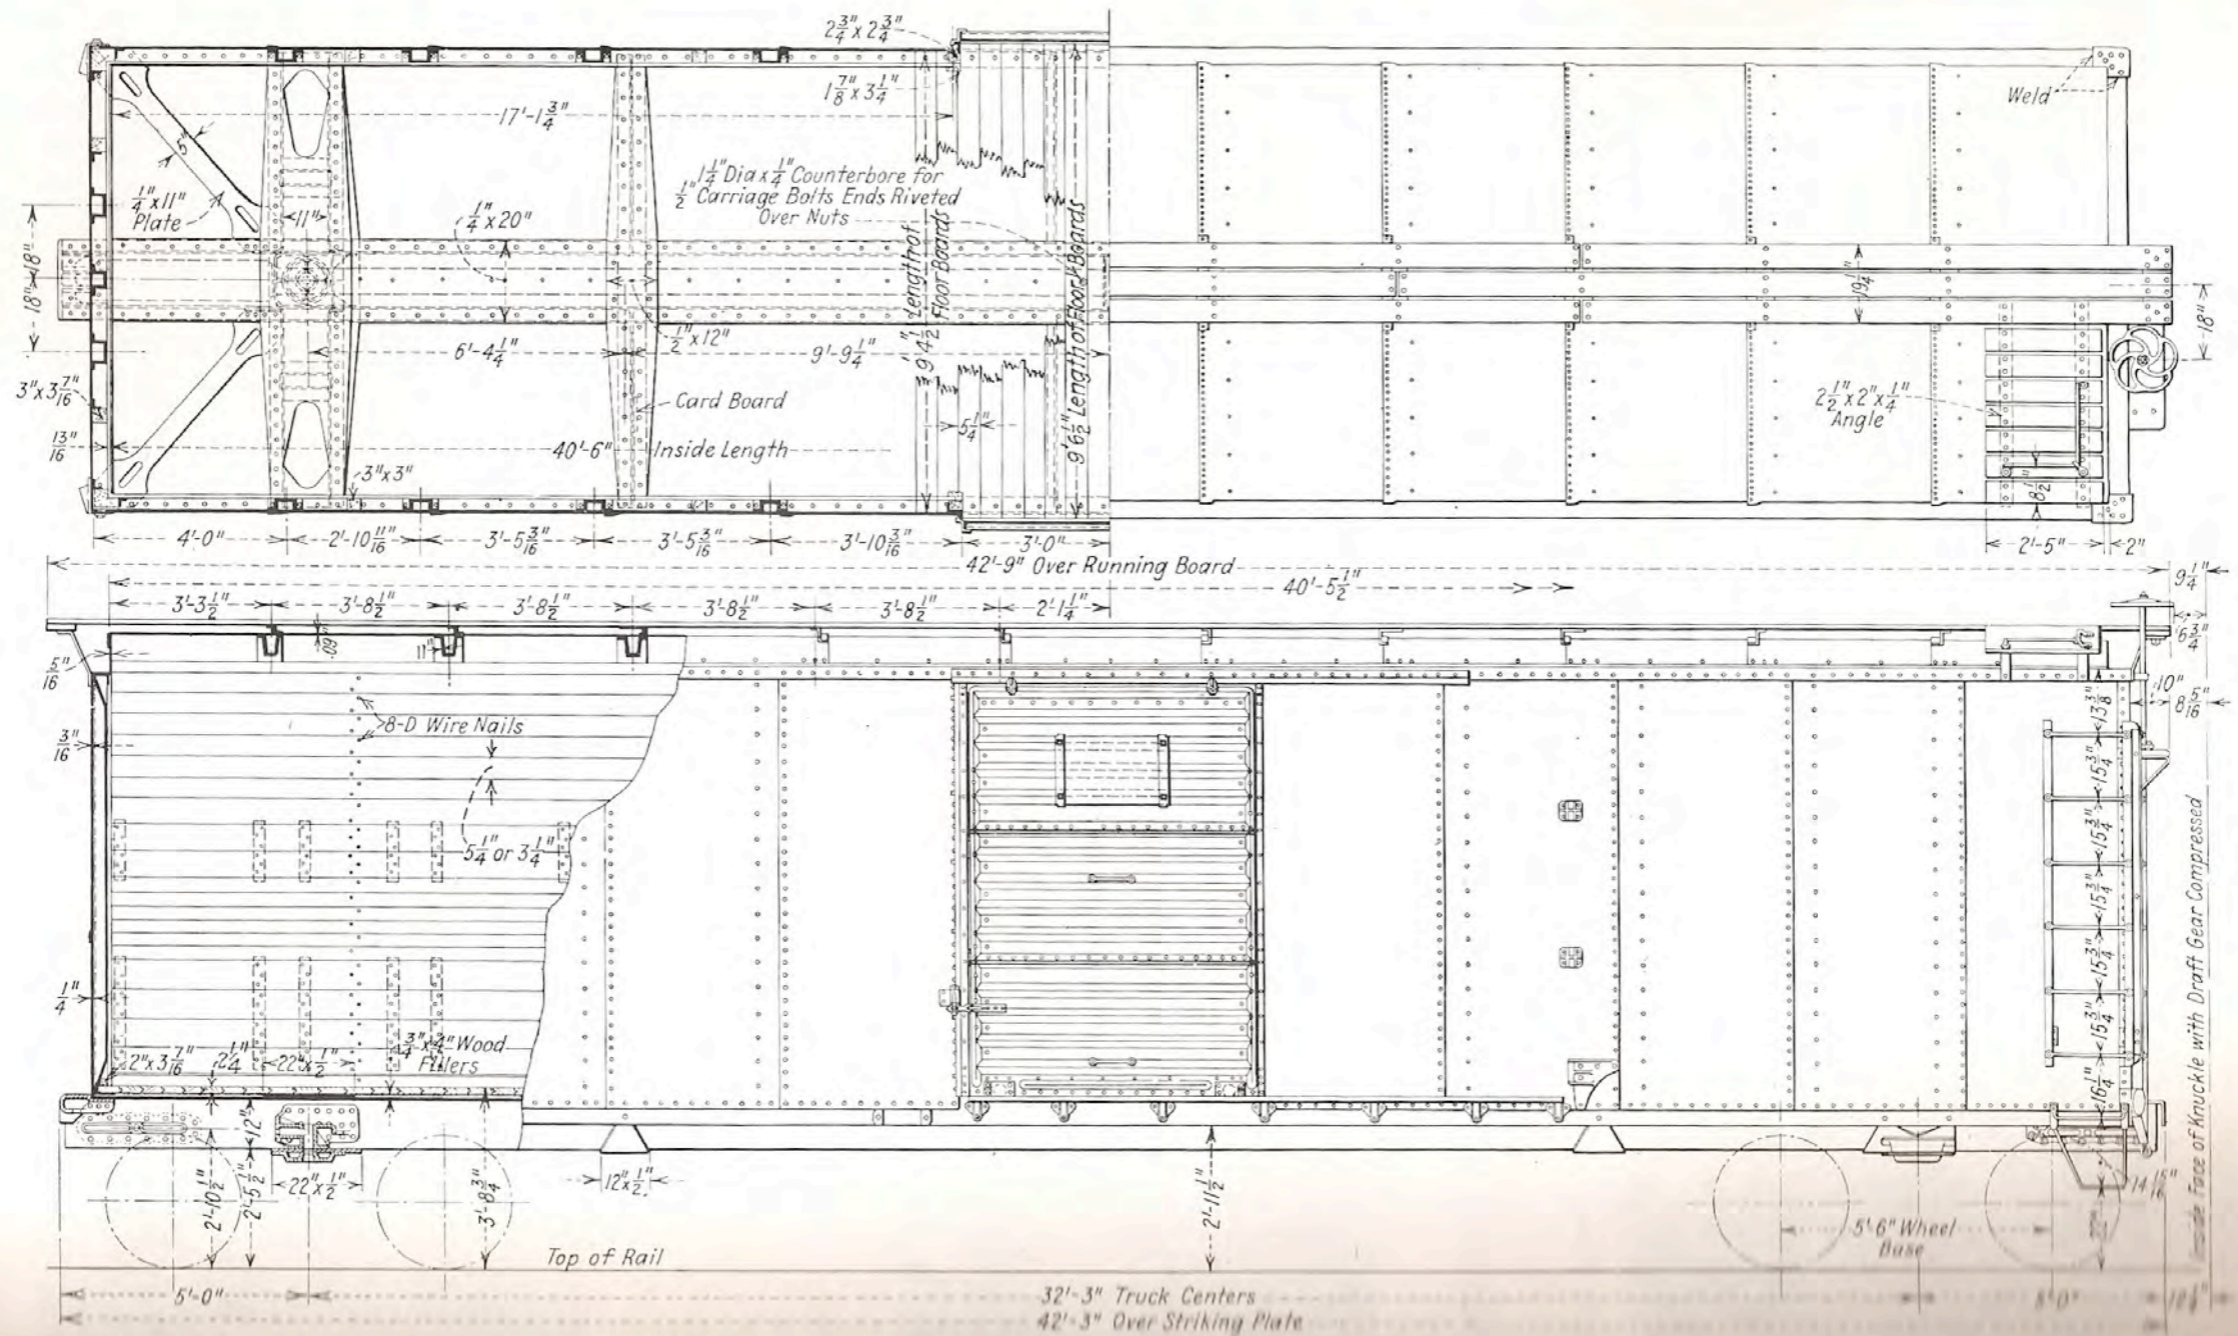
Plan and Elevation of The Pennsylvania Railroad Double-Sheathed Steel Box Car—Steel Frame and Sheathing with Wood Lining—of 50-Tons Capacity. Road Class X29.
